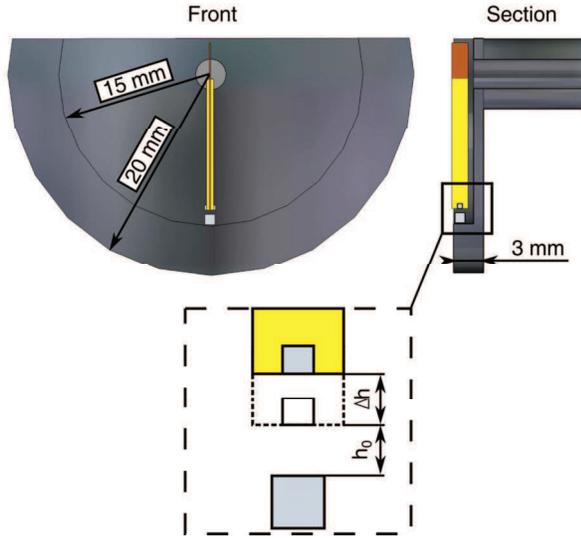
Front and section views of the piezoelectric rotational harvester, detailing the arrangement of the magnets
